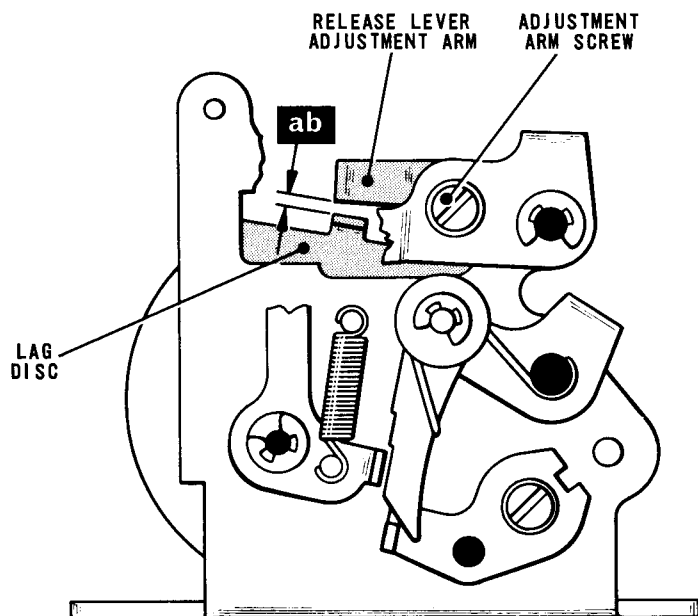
ANSWER-BACK LAG DISC CLEARANCE
